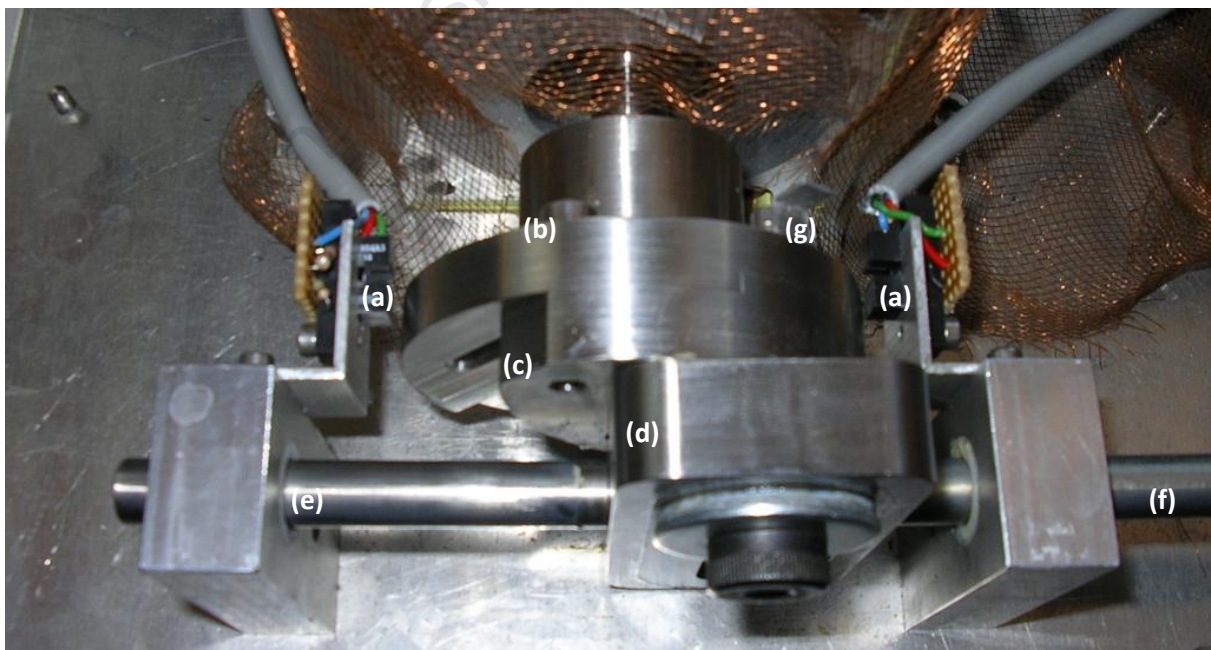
Scotch Yoke assembly with optical sensors: (a) optical sensors, (b) crank disc, (c) crank slider, (d) Scotch Yoke body, (e) linearization rod, (f) pushrod, (g) aluminium flag
